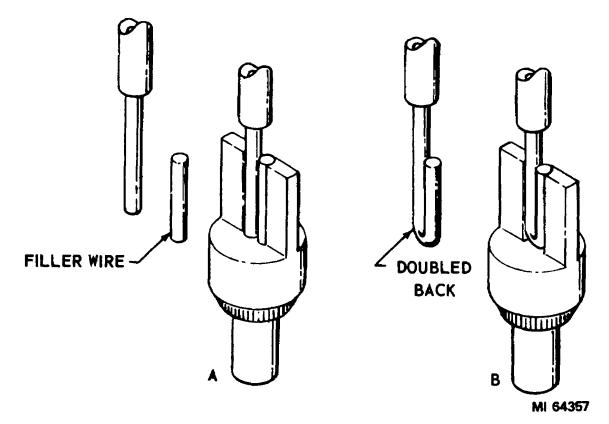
Soldering bifurcated terminal top route connections - typical.
